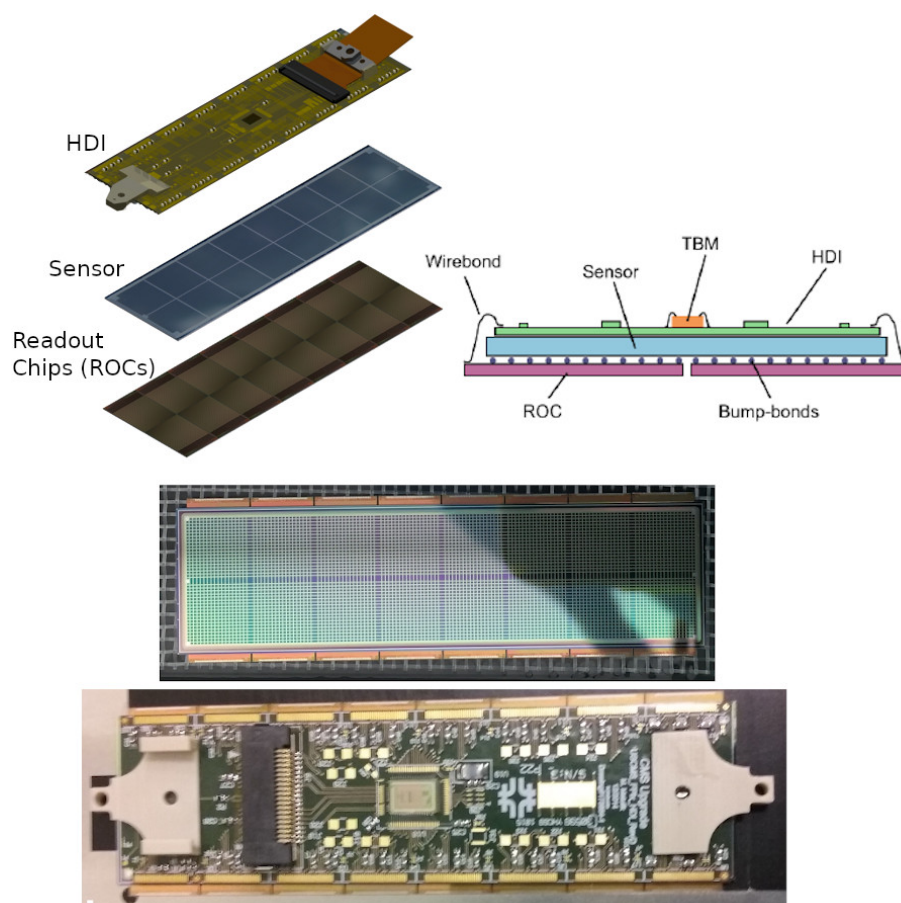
The Phase I FPIX module. Top Left: Exploded view showing the three layers that make up a module. Top Right: Profile view showing the components, including the wirebonds and bump-bonds. Bottom: Photographs of a BBM (top) and full module (bottom).
